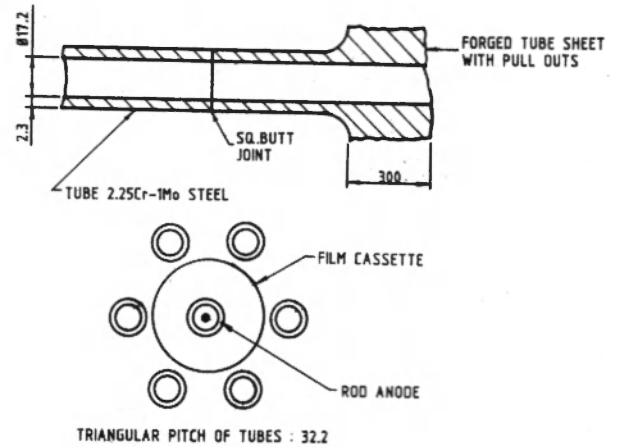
Sketch showing joint detail and tube layout configuration in steam generator assembly
